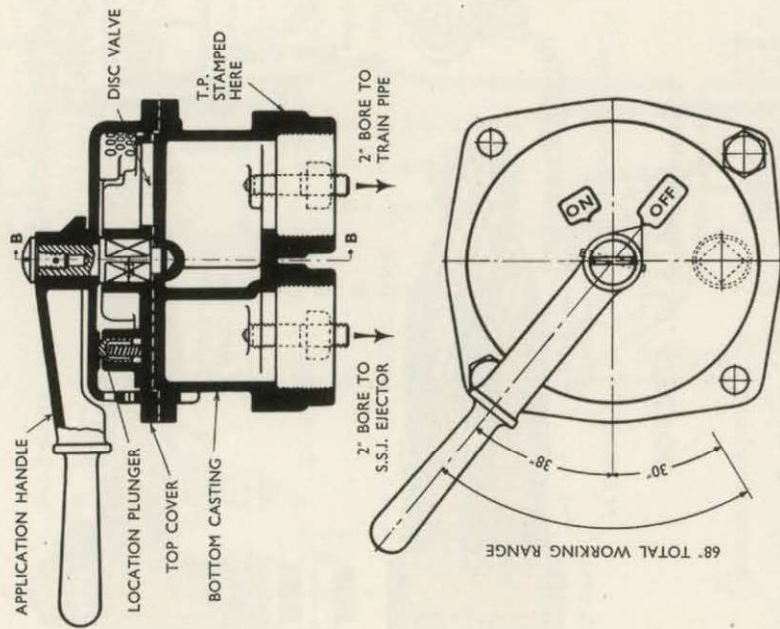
DRIVER'S BRAKE APPLICATION VALVE
